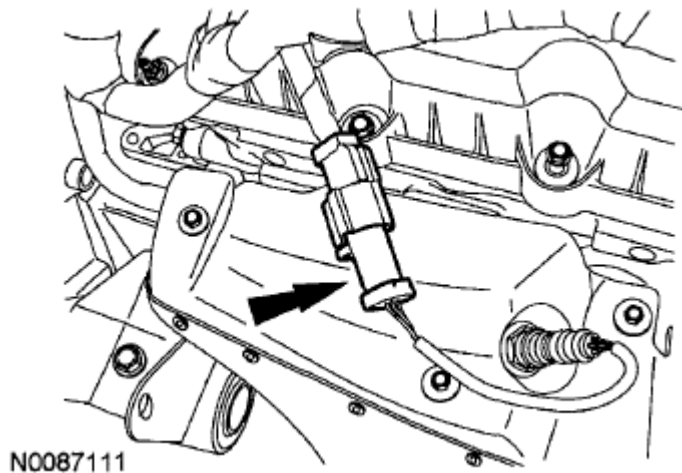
Locating RH Heated Oxygen Sensor (HO2S) Electrical Connector
